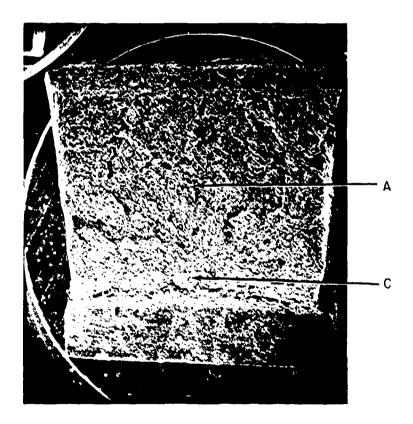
Fracture surface of an A-36 Charpy specimen tested at -18°C. 7x.
